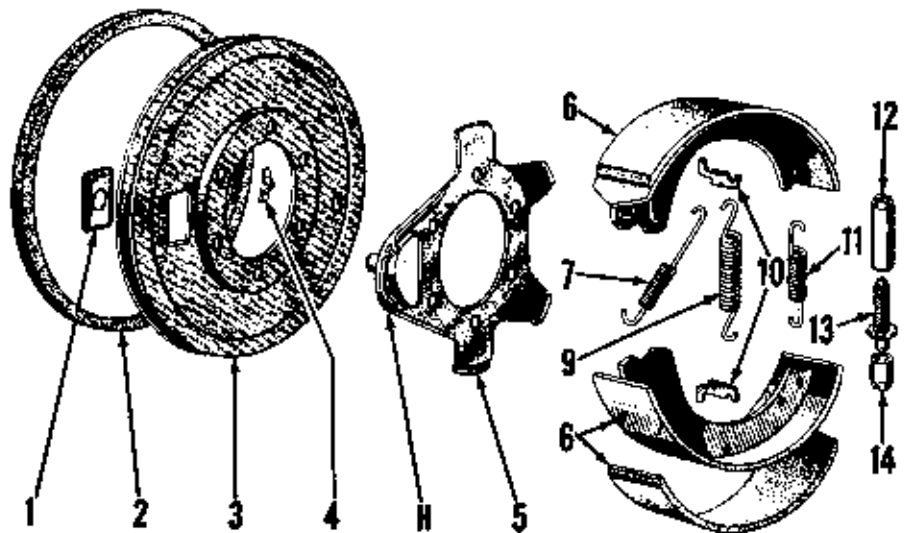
Exploded view of brake assembly. Spring anchors (10) fit in slots in brake shoes and brake retracting spring (9) hooks into notches in anchors. On left brake only, secondary retracting spring (7) hooks into upper spring anchor and hole (H) in anchor plate (5). Brake linings are bonded to shoes. Same brake backing plate (3) and anchor plate (5) are used in both R.H. and L.H. brake assemblies. Left brake assembly is shown; right brake is inverted.
